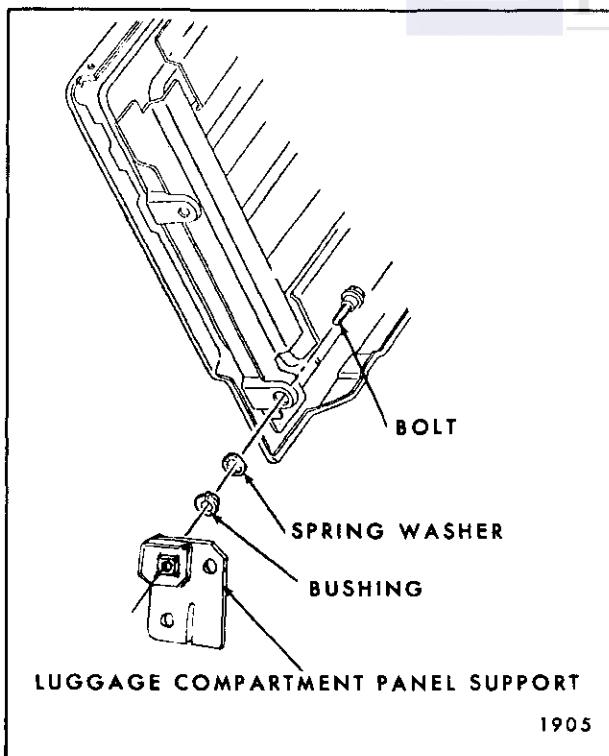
Luggage Compartment Panel Attachment to Body
